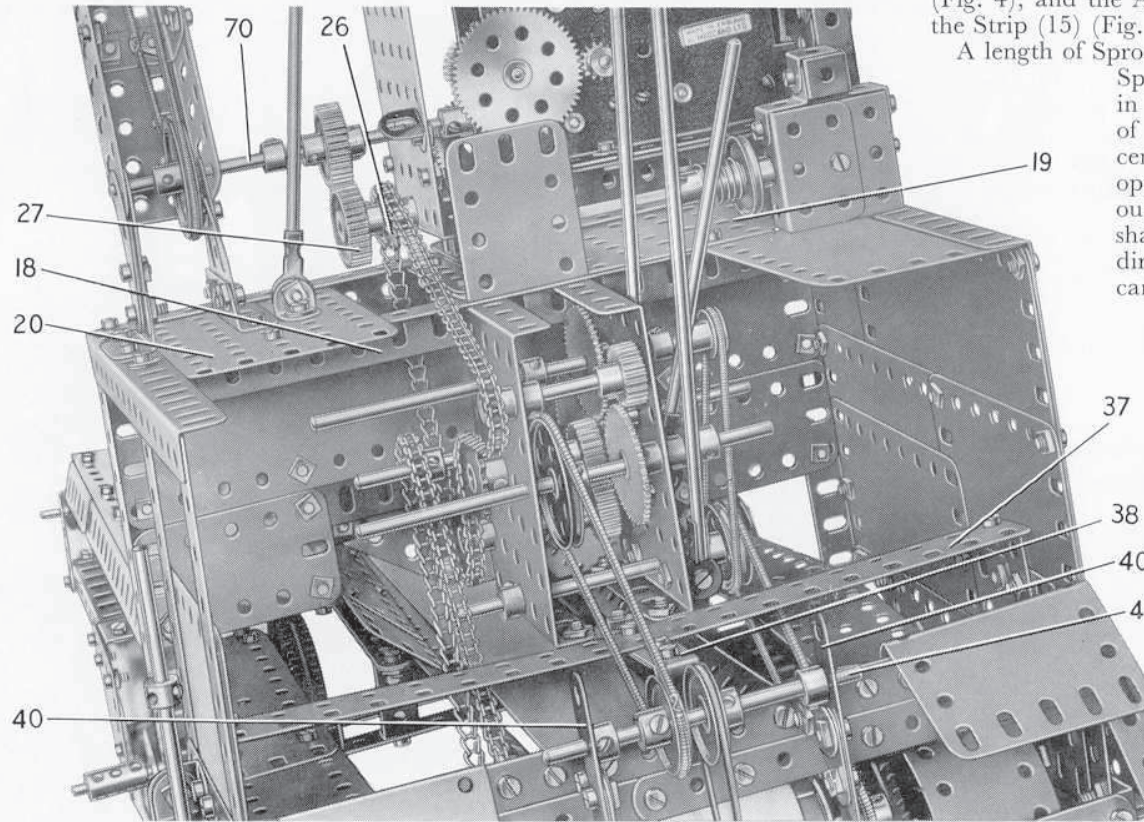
A close-up, showing driving arrangements from the Electric Motor and gear-box
